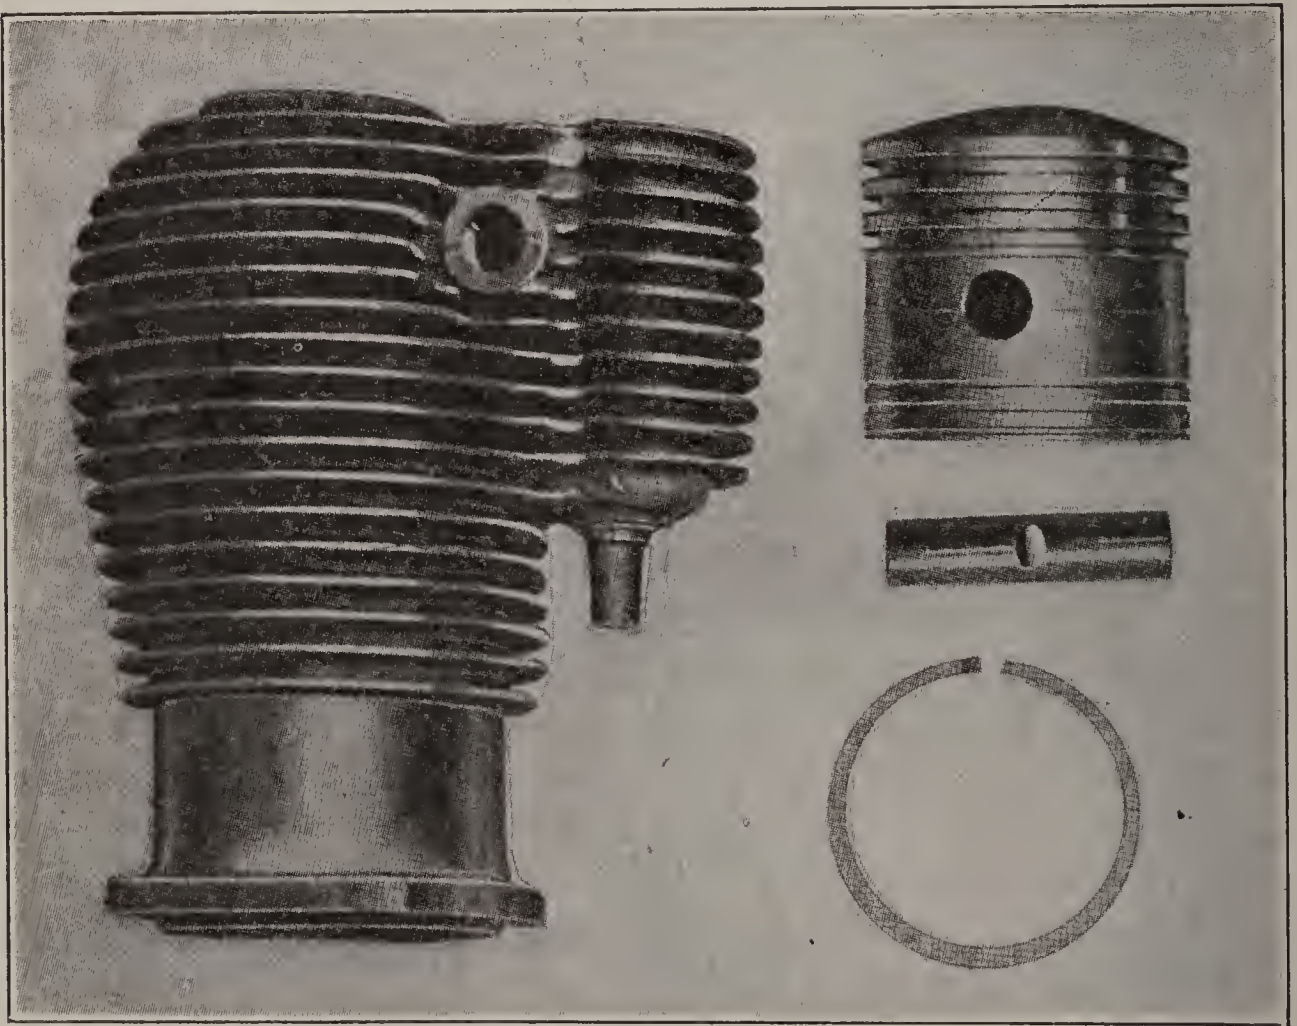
One-Piece Cylinder Construction, Also Dome Head Piston, Wrist Pin and One of the Eccentric Piston Rings Used With It.
